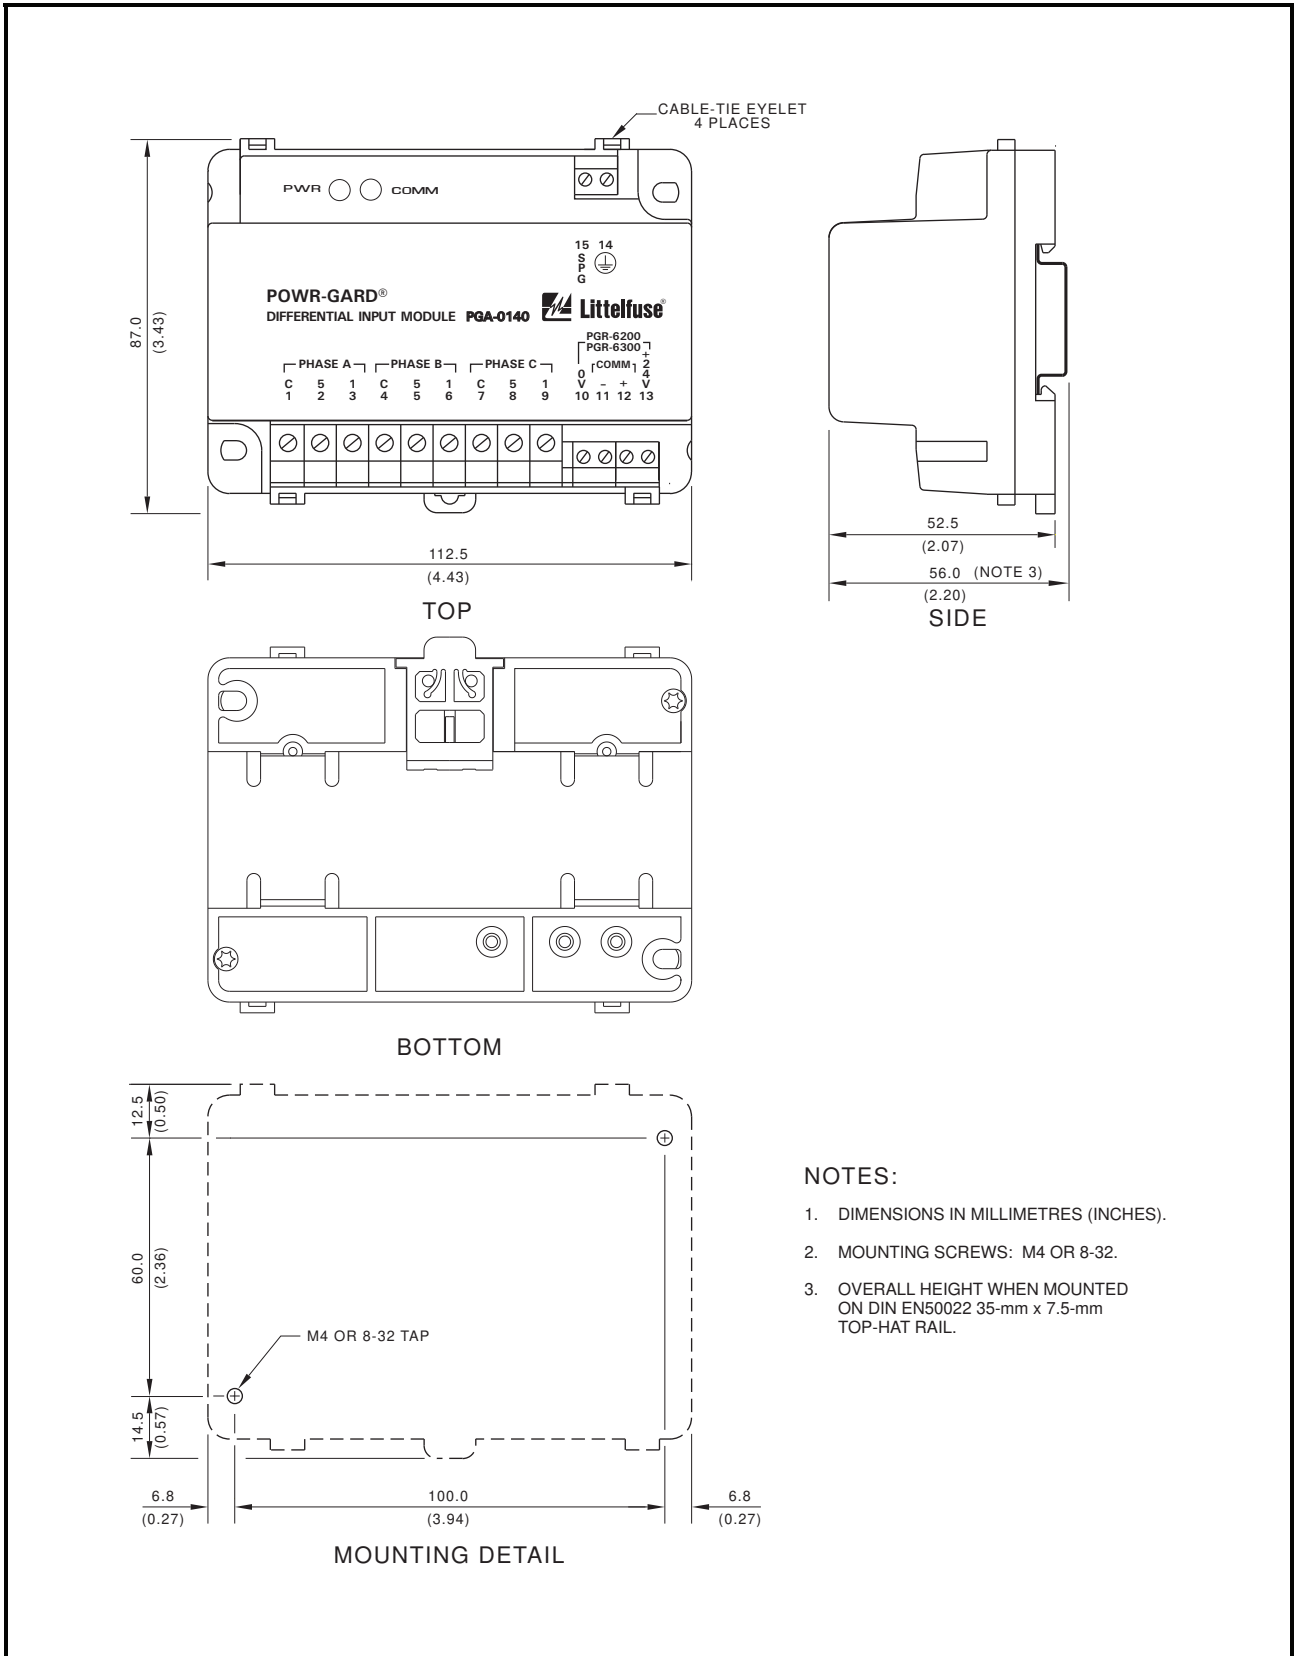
PGA-0140 Outline and Mounting Details.
